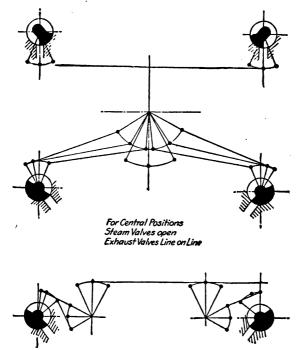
Double eccentric valve gears with parallel motion for steam and wristplate or bellcranks for exhaust.
